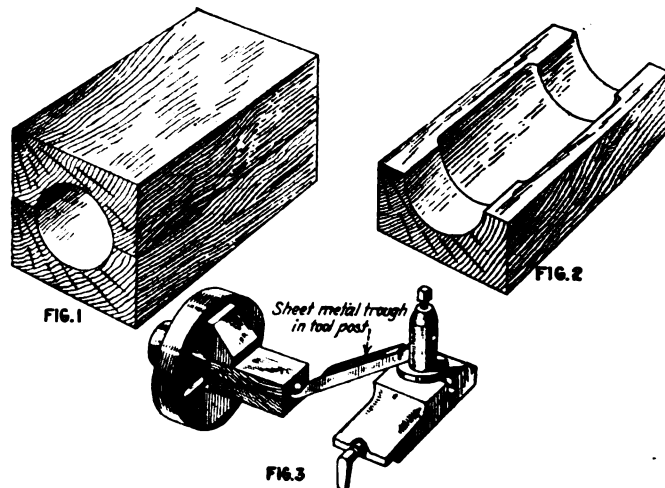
THE BLOCKS BORED OUT. FIG. 2—THE RECESS FOR THE BEARING. FIG. 3—READY TO POUR THE BABBITT
